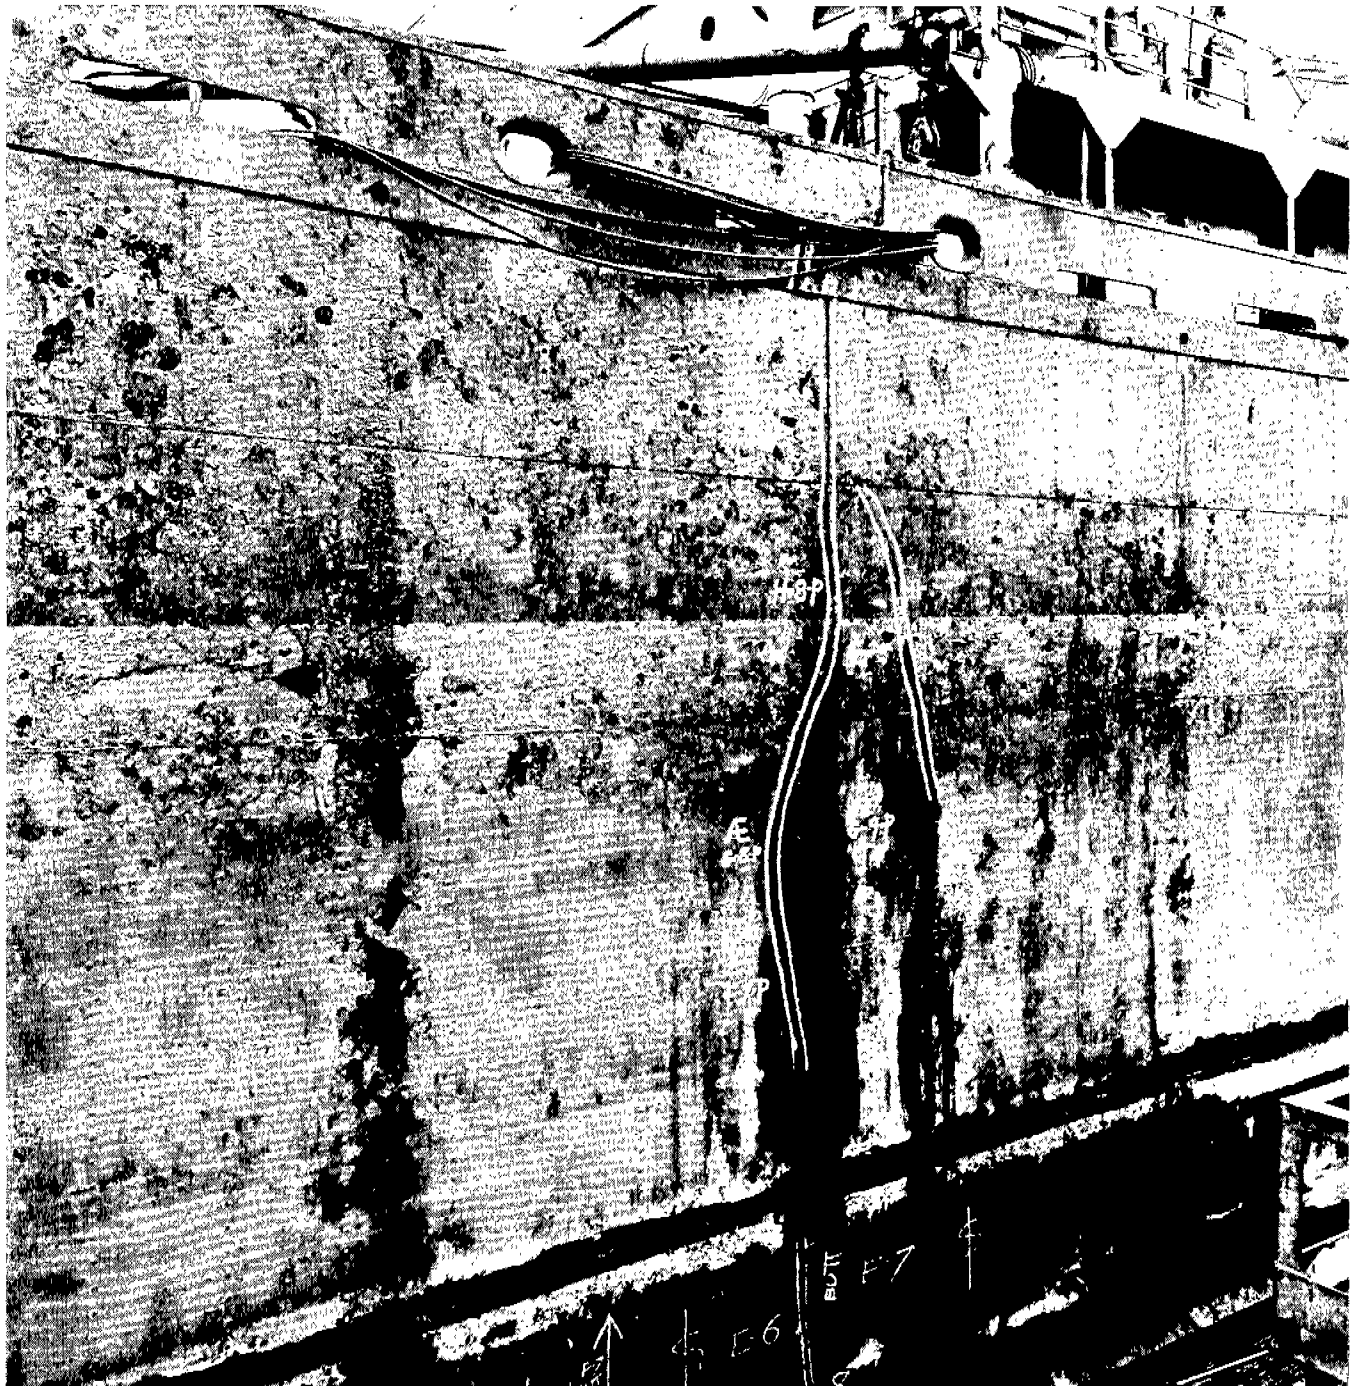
Crack in ship plate which crossed an arrester, with spacing between the entering and outgoing crack
